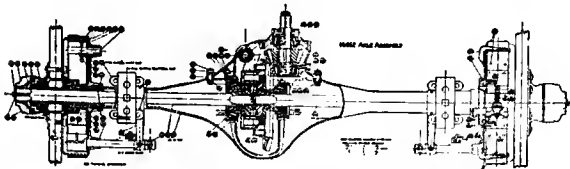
Plan view of one-piece rear axle, gear carrier, brakes, and wheels, illustrating method of placing gears.
